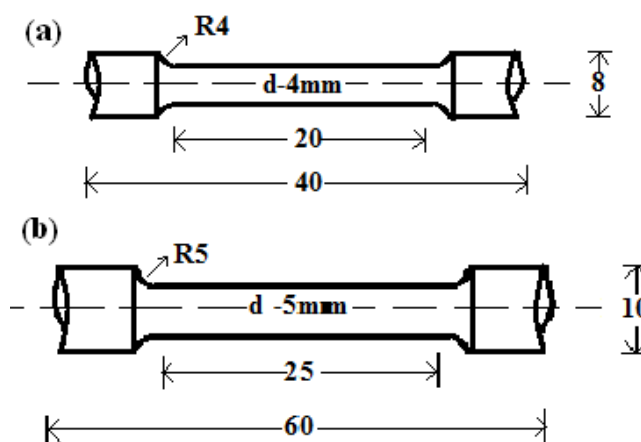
Schematic diagram of the tensile specimens sample (a) base metal as well as processed specimens and (b) all weld metal at different locations of weld metal(all dimensions in mm) [ASTM E8M-09 2011].
